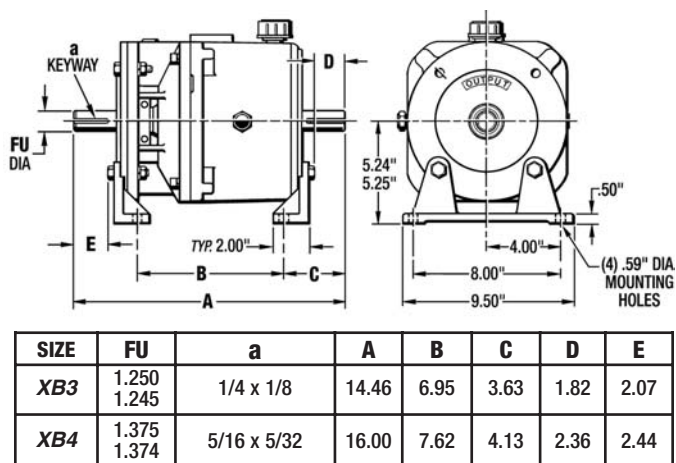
XB3 and XB4 Coupler Brake Dimensions
